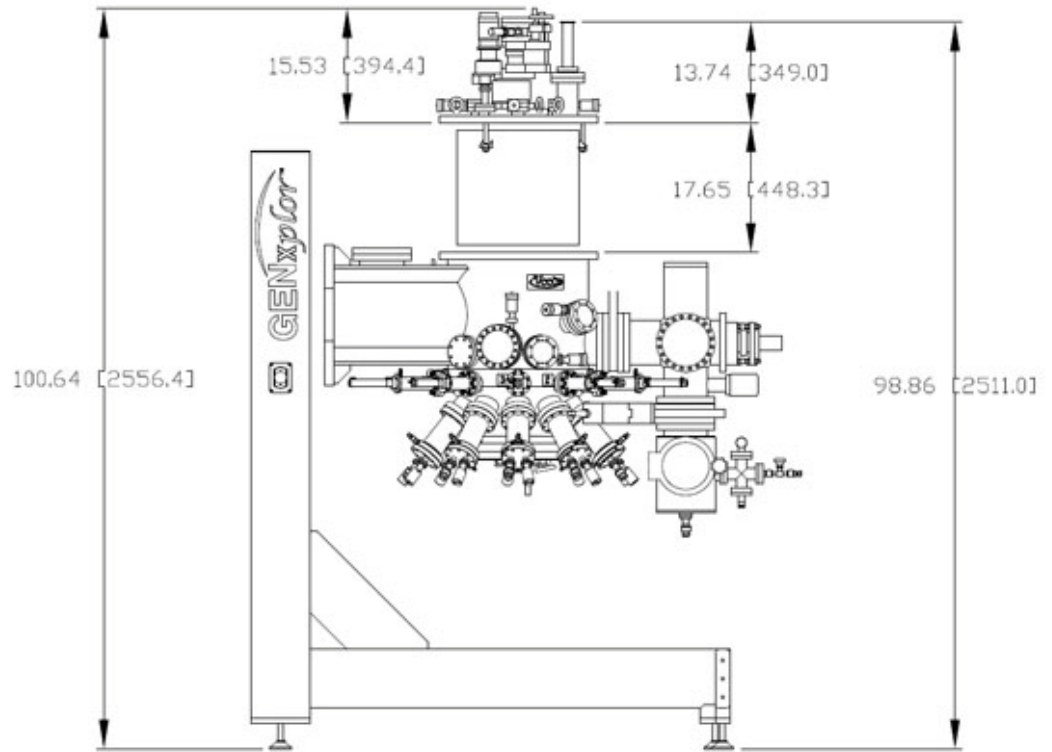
Cryopump Dimensions (Side View, Full Elevation)
